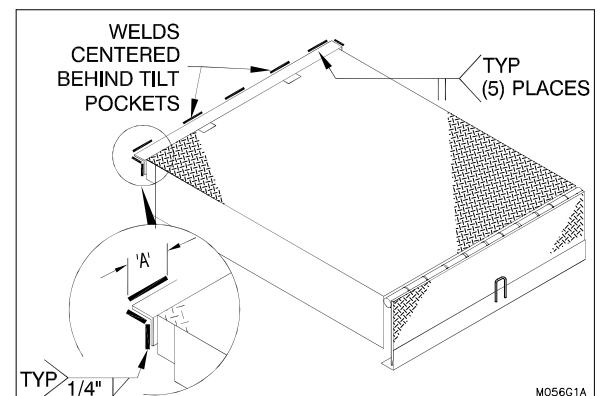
Hydraulic Dock Back Angle Weld of Dock Leveler
